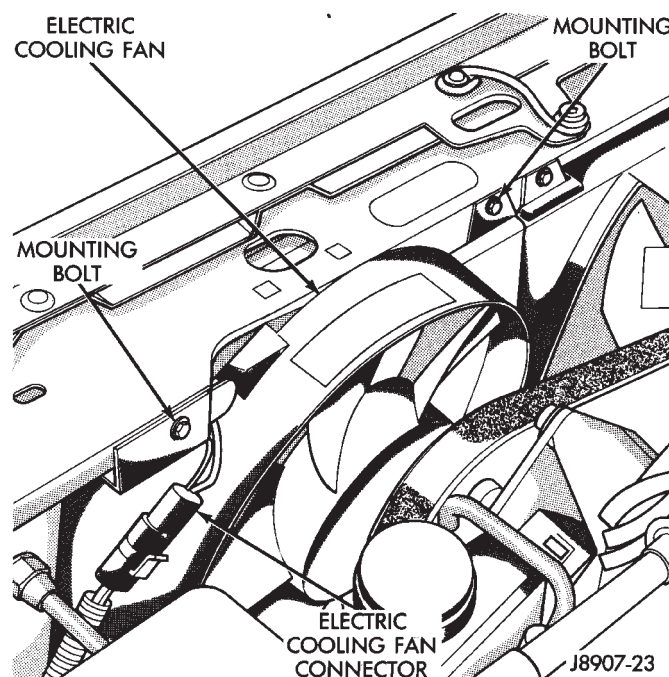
Auxiliary Electric Cooling Fan Wiring Connector—Typical
